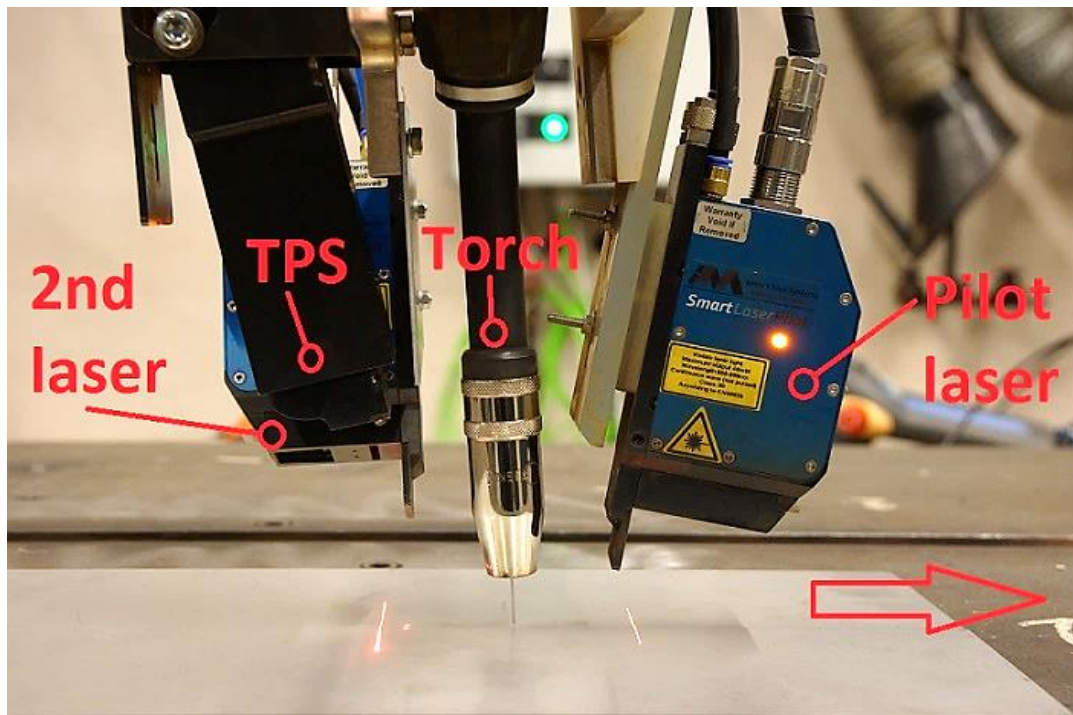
Adaptive welding head, including two laser sensors and TPS 34 mm behind the tip of the electrode wire. The arrow indicates travel direction.
